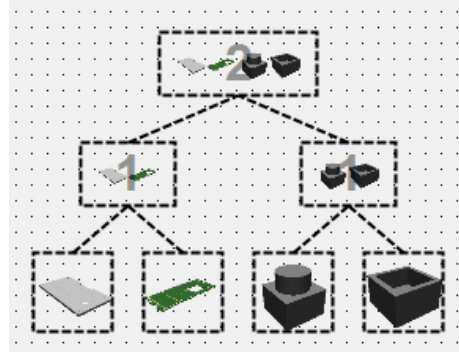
An assembly graph for a partial assembly of a cell phone. A metal plate, a *shield can*, is pressed onto a printed circuit board (PCB) and a cell phone camera is inserted into a socket. The camera socket is then fastened on the PCB.
